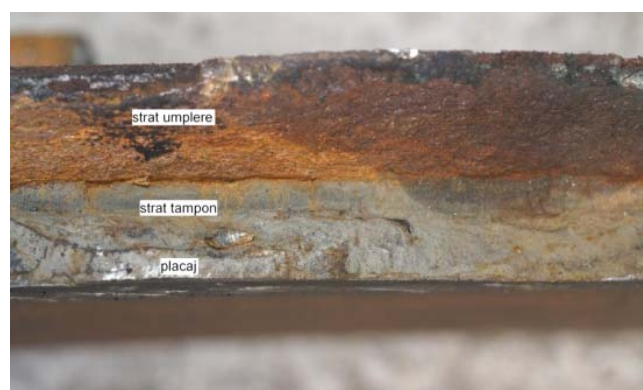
Crack path through weld (ring 2 details, coupon 5).
